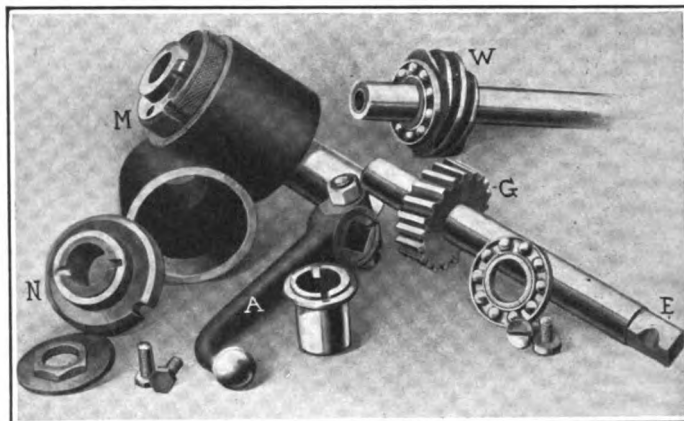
Parts of Krit steering mechanism. Note ball-bearing thrust
